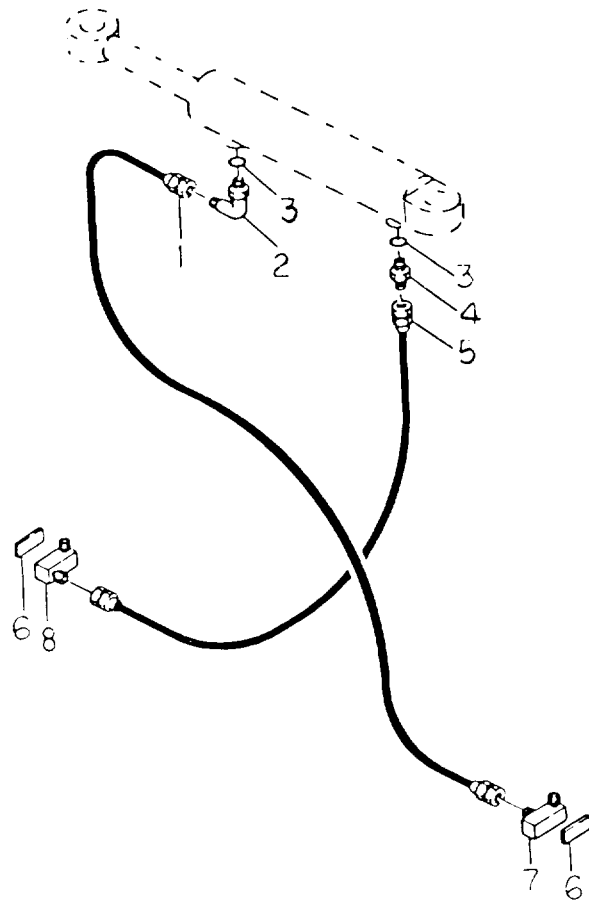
HYDRAULIC MAST PIPING, SIDE SHIFTERS
